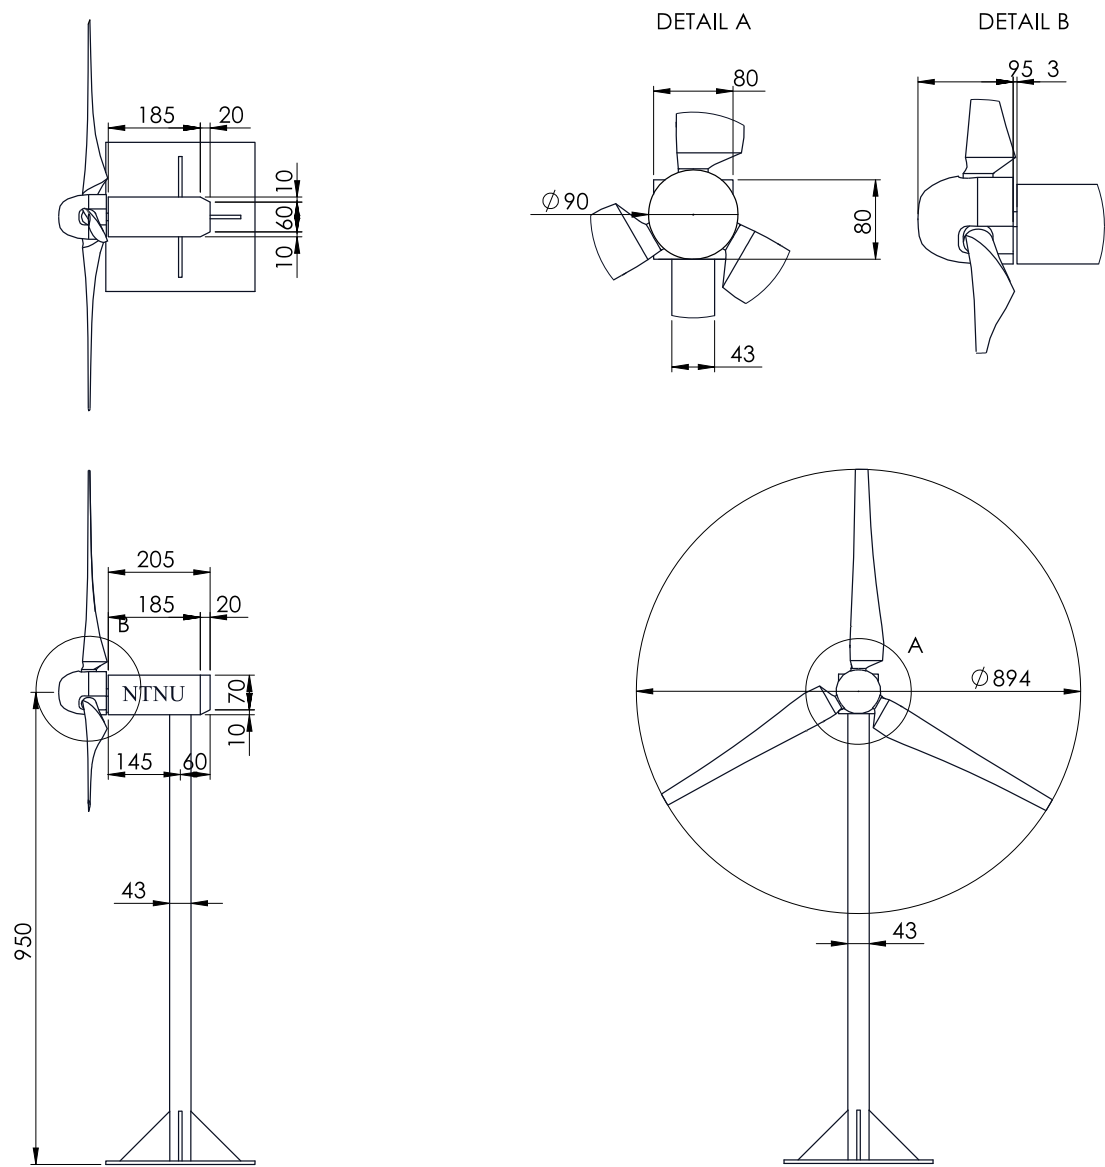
Technical drawing of NTNU model wind turbine LARS1.
